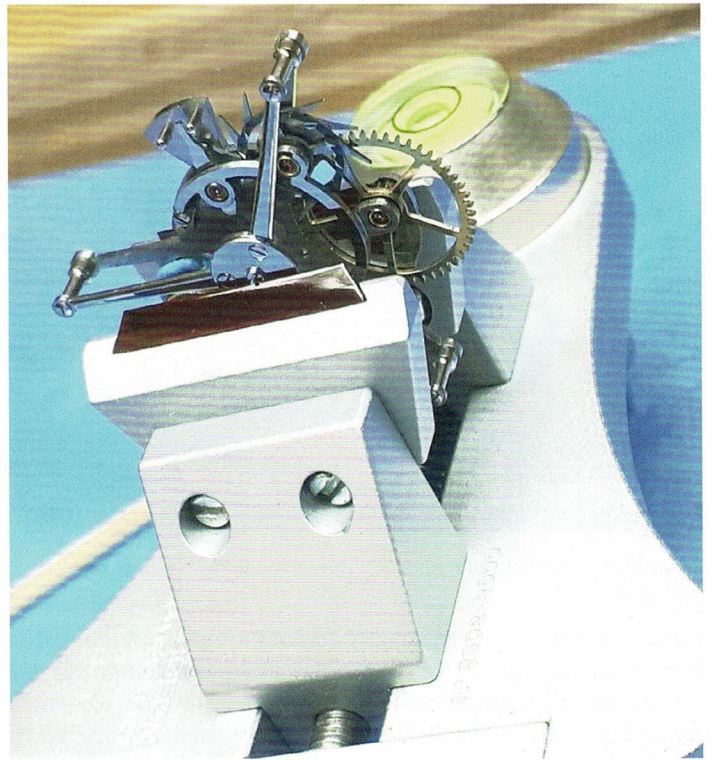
Poising the 4 minute carriage assembly for the ‘slow’ tourbillion.
